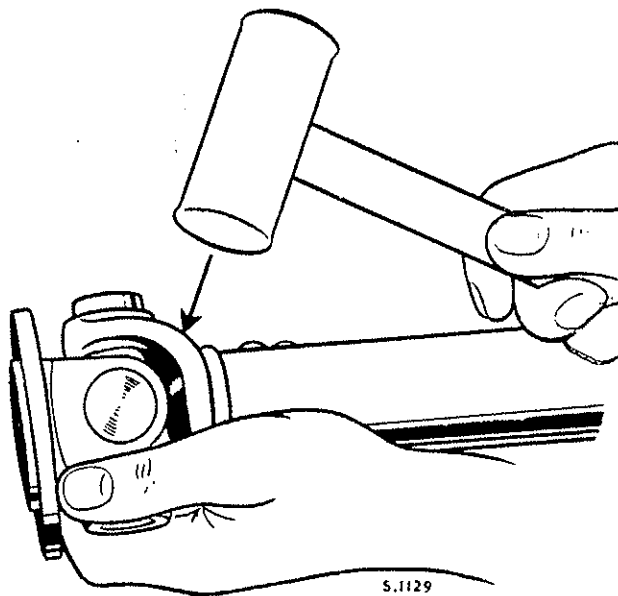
Removing the bearing cage by lightly tapping the yoke radius
